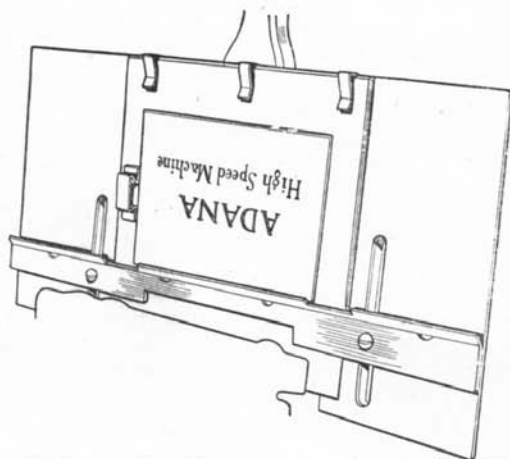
Make-ready—Lay gauges in position and a trial print taken on the actual stock to be used. Note how the side lay-gauge is simply made from stiff bent-up paper.
